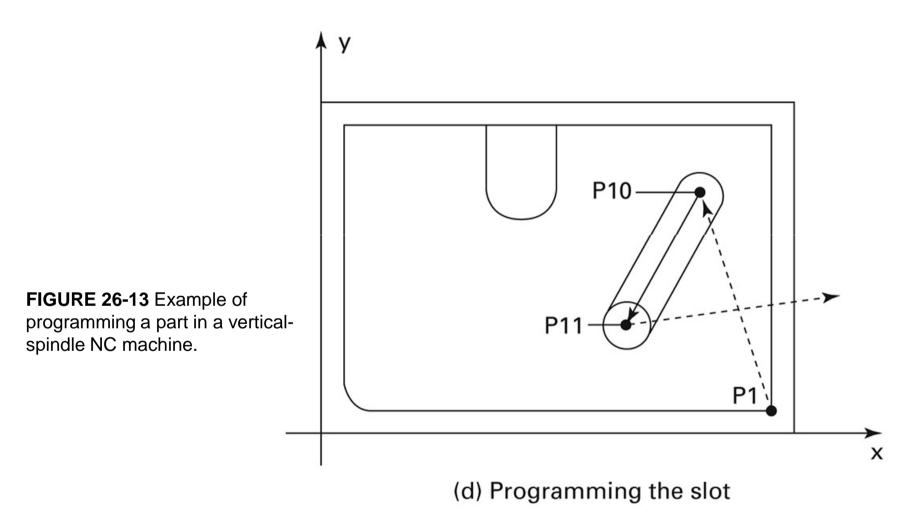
Example of programming a part in a vertical-spindle NC machine.
